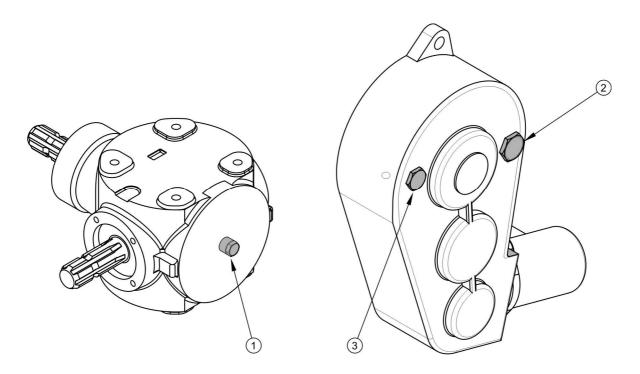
Oil inspection and filling points on the reduction gears
